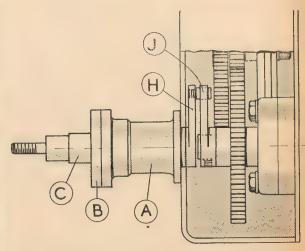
The attachment fitted to the M.L.7 lathe. Showing the arm—H—driving the leadscrew driven arm—J
